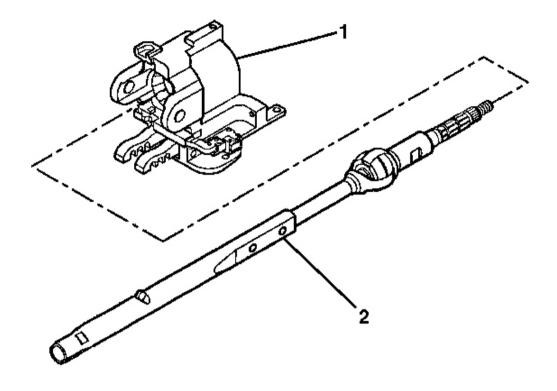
Steering Shaft Assembly & Steering Column Tilt Head Housing Assembly Courtesy of GENERAL MOTORS CORP.
